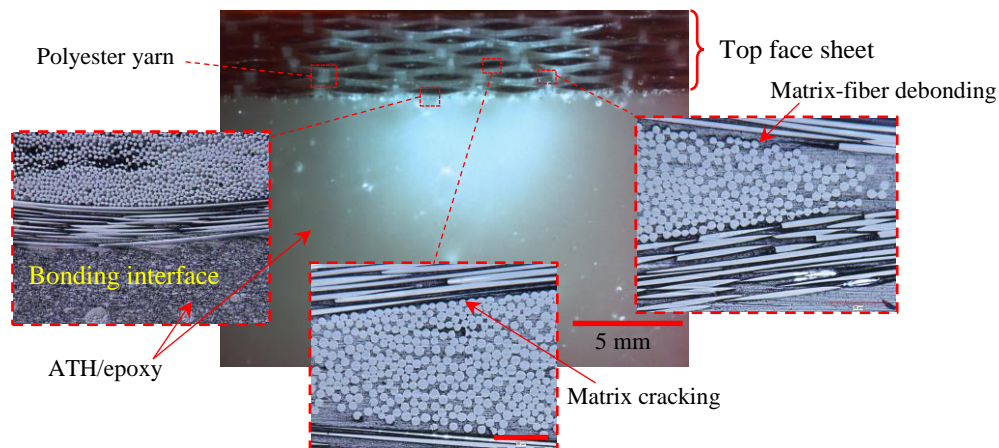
Damage observed after cross-sectioning in a sandwich specimen at 40 J
